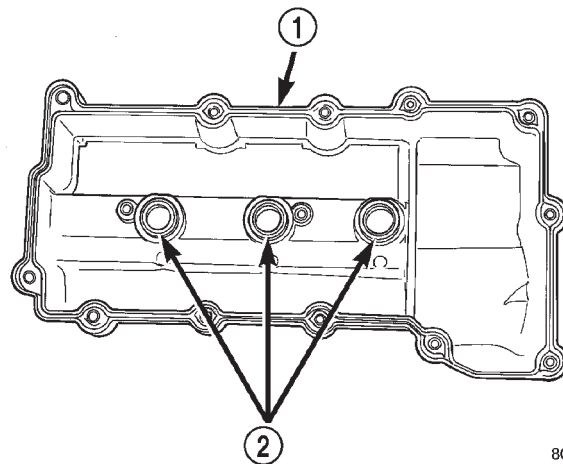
Cylinder Head Cover Gasket and Spark Plug Seals
